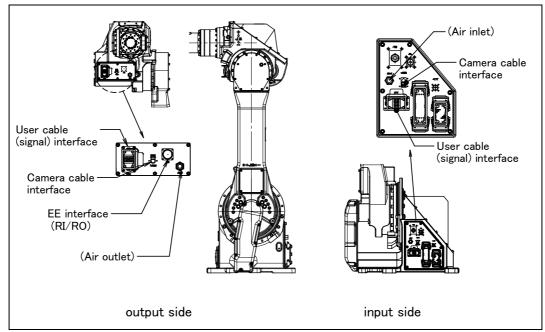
(c) Position of air supply and option cable interface (RI/RO) (When mechanical unit cable A05B-1125-H259 is specified)
